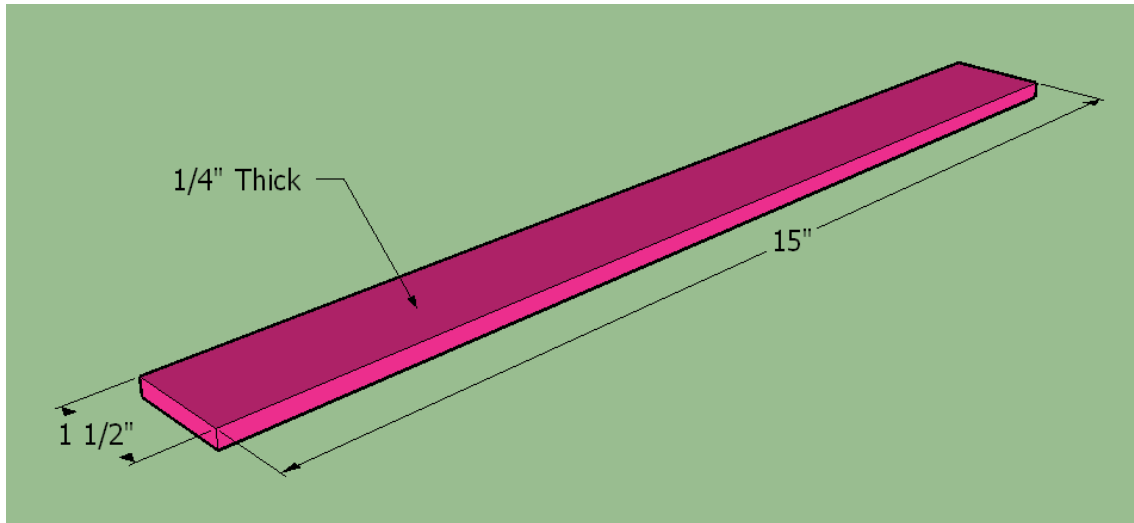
Flat Strip of the Base Plate- Sample Holder of Rectangular Specimens.
